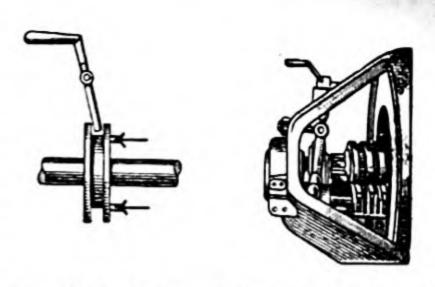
Rotor-winding shorting and brush-lifting mechanism.
